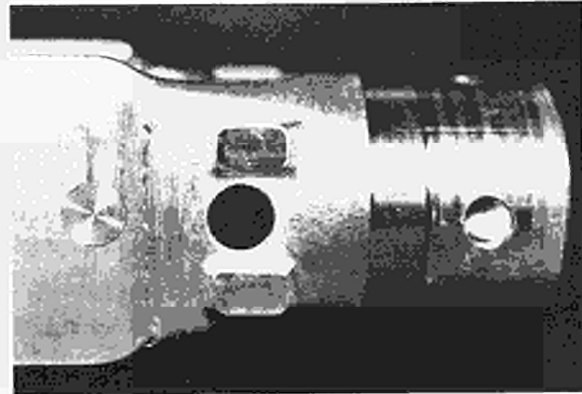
b: MTR fuel element (HFR PETTEN) with rivet seal.
